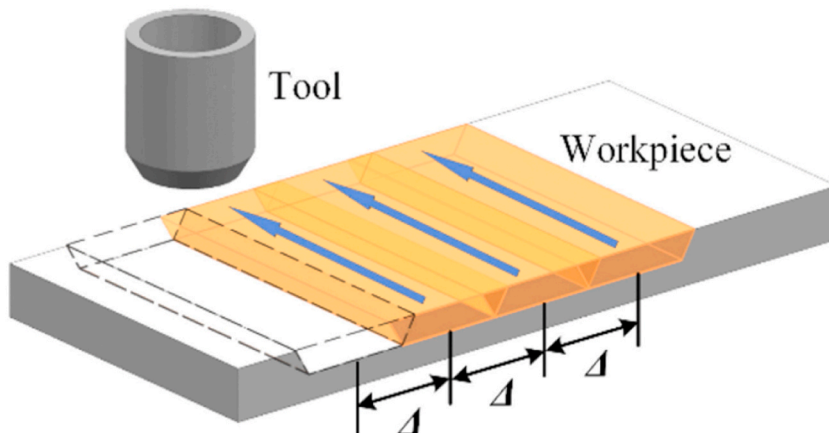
Schematic diagram of flat milling using a cylindrical tool [40].
